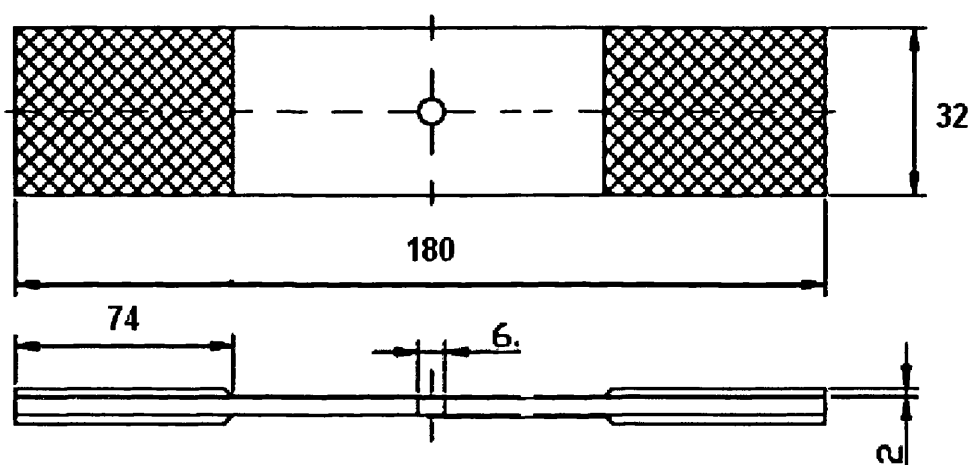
Dimension of coupon for open hole compression test (mm)⁽¹⁰⁾.
